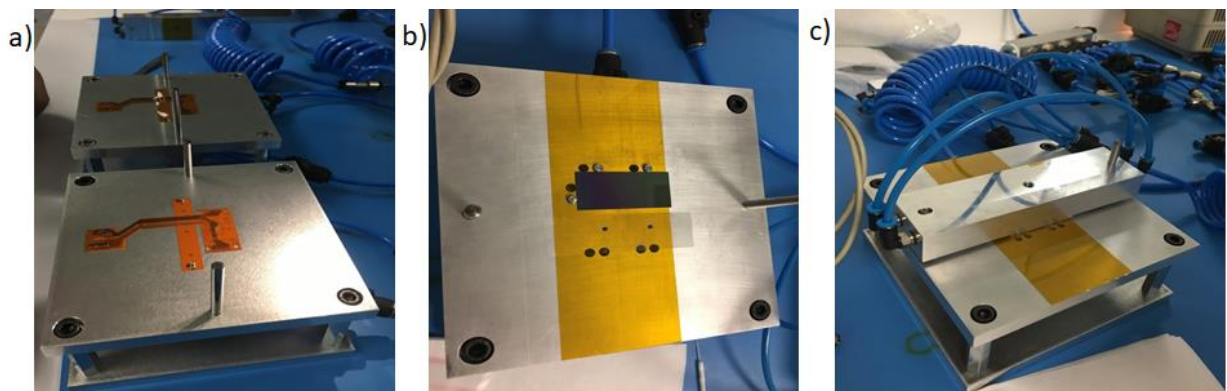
a) An assembly jig to position the flexes; b) A jig to position silicon device (the dual heater is shown); and c) A bridge to transfer the sensor to the jig with a flex (picture shows the bridge in the final position during the curing process). In order to guarantee the correct alignment and relative position of the heater and the flex, the positioning jigs and the bridge employ a system of matching dowel pins.
